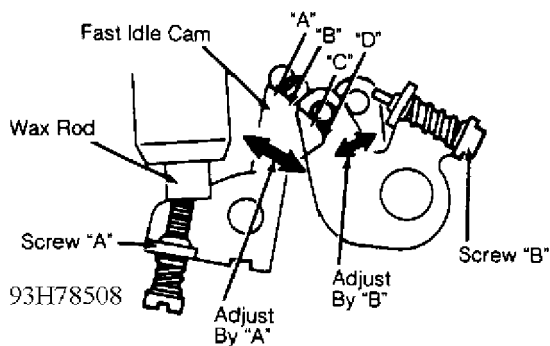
Adjusting Fast Idle Cam Opening (RX7)
